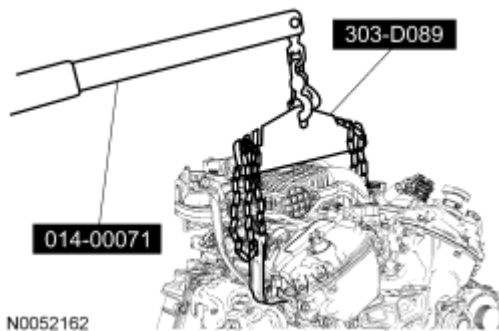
Removing Engine & Transaxle From Lift Table Using Special Tools (303-D089, 014-00071) & Suitable Engine Crane
